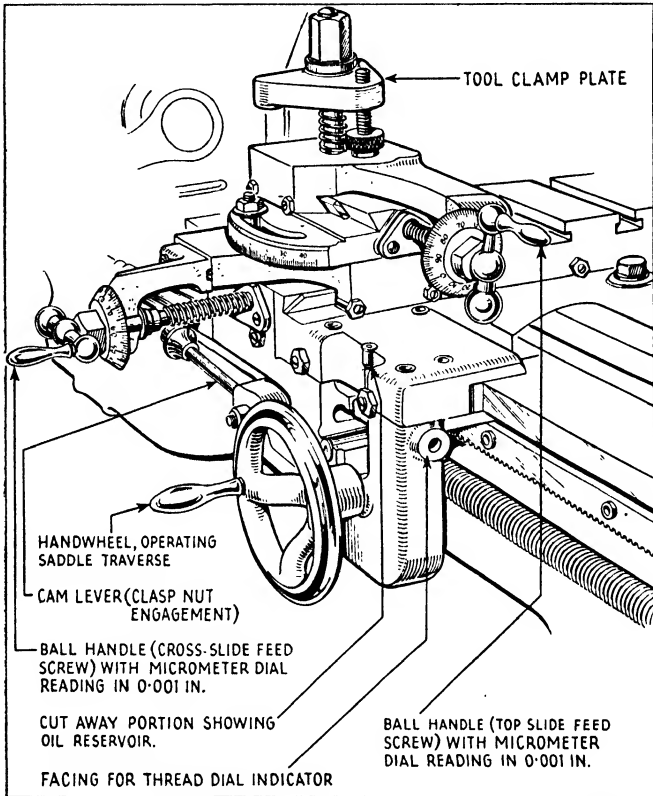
CARRIAGE OF LATHE SHOWN IN FIG. 34, ALSO PARTLY SECTIONED TO ILLUSTRATE CONSTRUCTION
